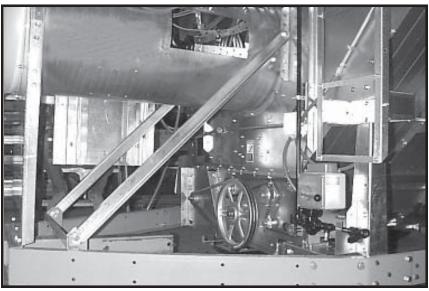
Front diagonal support channels bolted to diagonal support brackets and hitch weldment.
